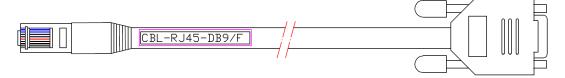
Alarm Cable - CBL-RJ45-DB9/F
